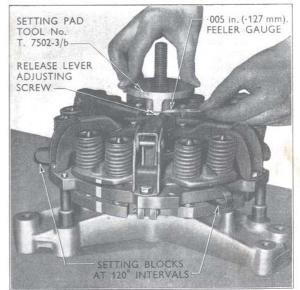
Checking the Setting of a Release Lever Adjusting Screw
